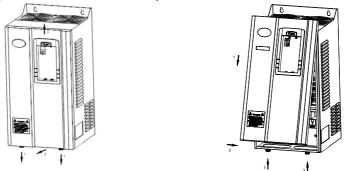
Cover removal & installation of the wall-mounted sheet metal housing AC drive
